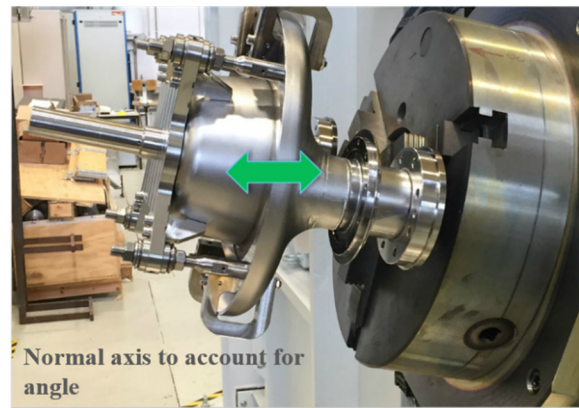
Simultaneous axis movement during EB welding of elliptical edges.
